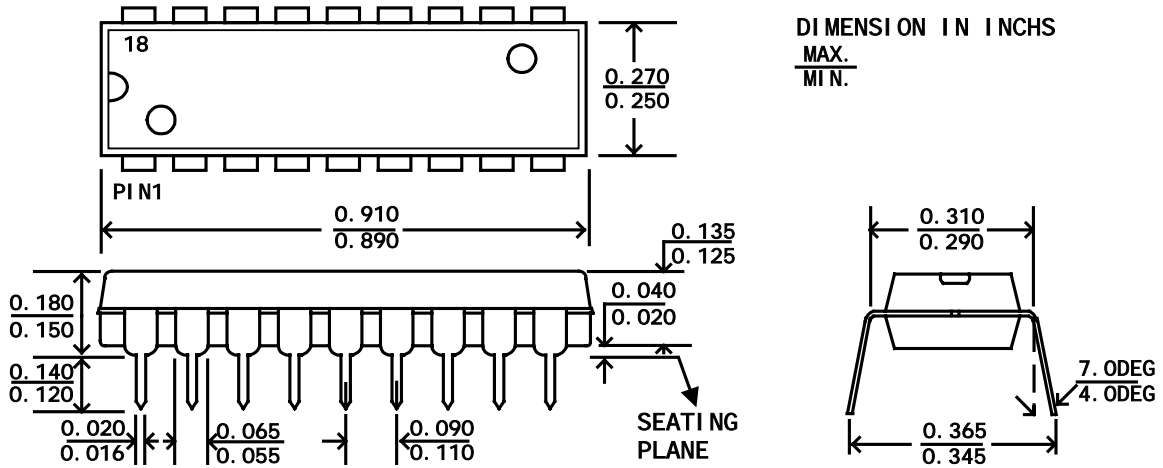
Package Outline Dimension for 18-Pin P-DIP
